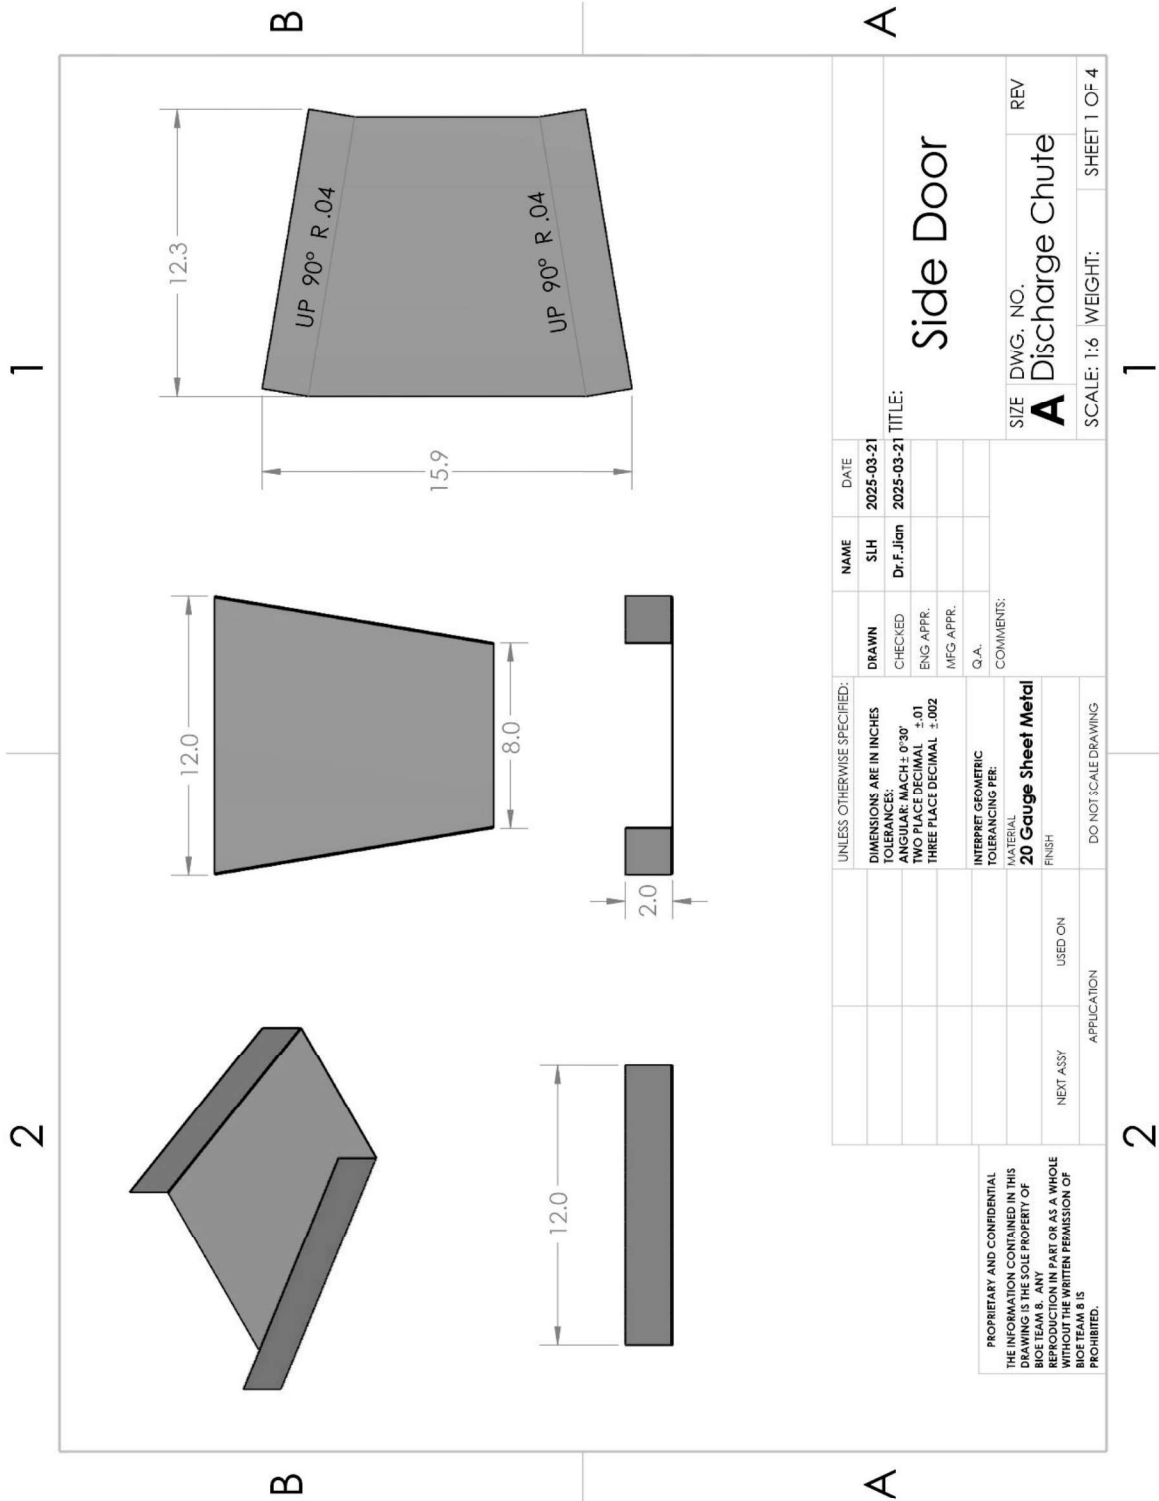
Detailed engineering drawings of the discharge chute on the side door.
